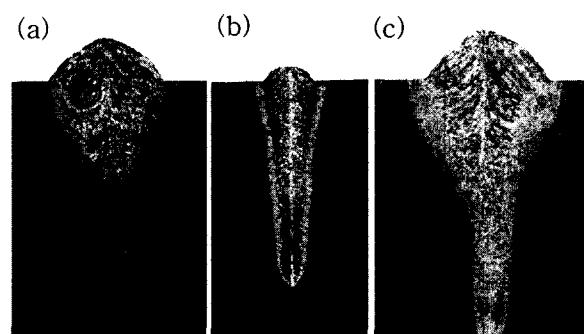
Bead shape of (a) MIG welding (14.3kW), (b) laser welding (12kW) and (c) MIG (13.9kW)-Laser (12kW) hybrid welding.
